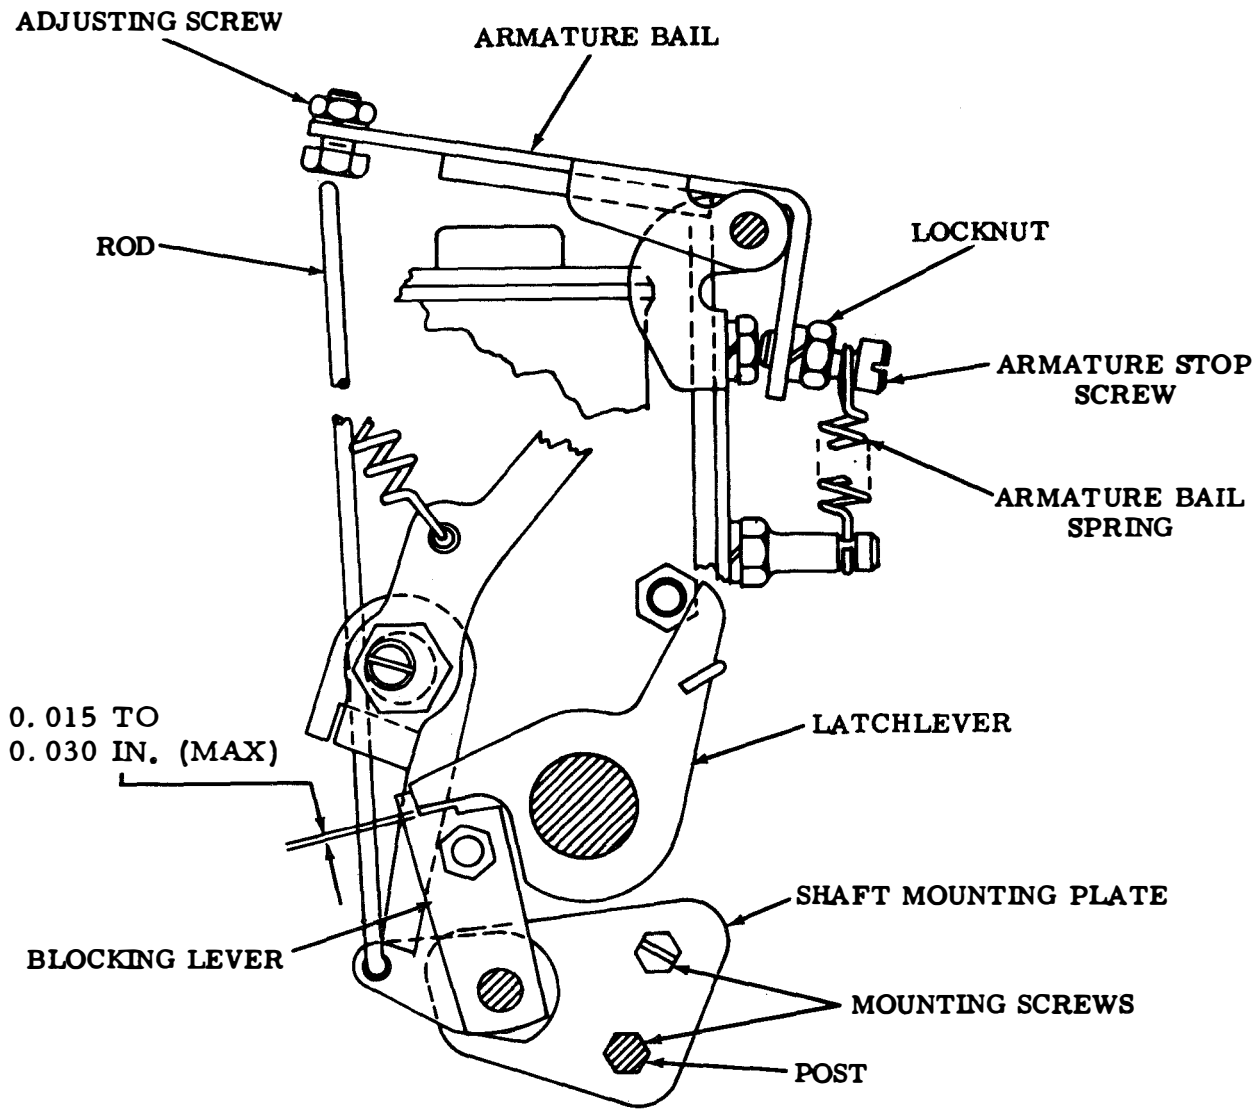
Blocking Lever with Shaft Mounting Plate
